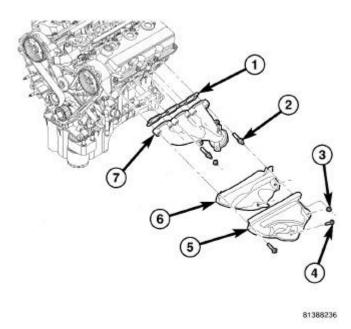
Left Exhaust Manifold Assembly Courtesy of CHRYSLER LLC
